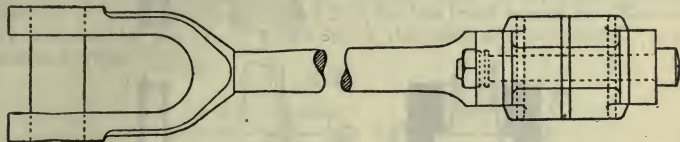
Marine connecting rod with forked wrist pin end; the two branches carry the wrist pin.
